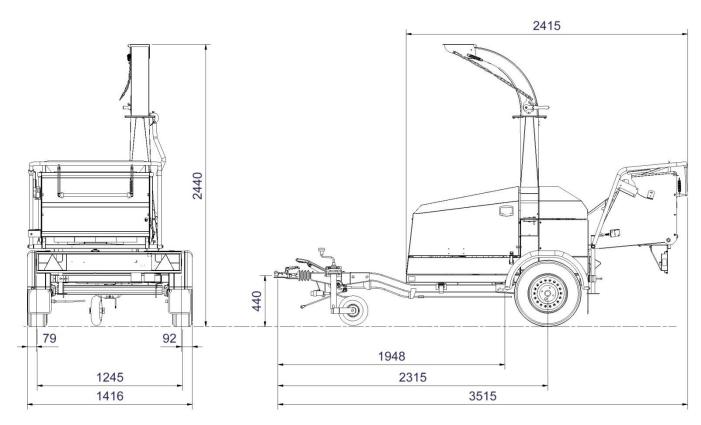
Dimensioned sketch for TP 175 MOBILE with foldable funnel (funnel folded up)
